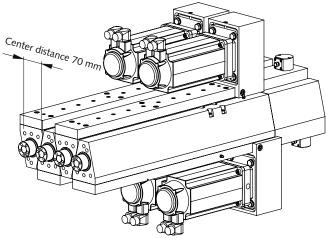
Extremly narrow assembly space requirements from NC joining module NCFS
